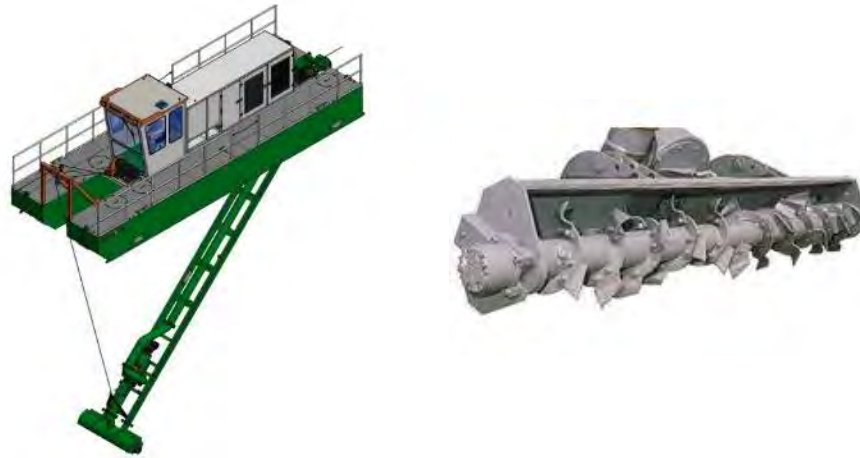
Left: typical auger dredge, Right: close-up of the Archimedean screw-type cutter head
